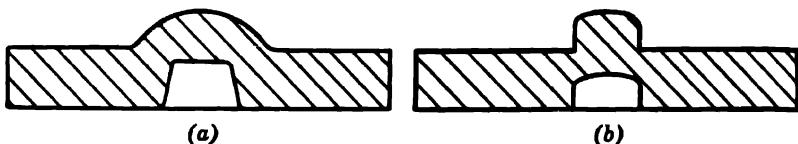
Cross sections of projections for projection welding. (a) For 24- to 5-gage sheet material. (b) Incorrect type of projection.
